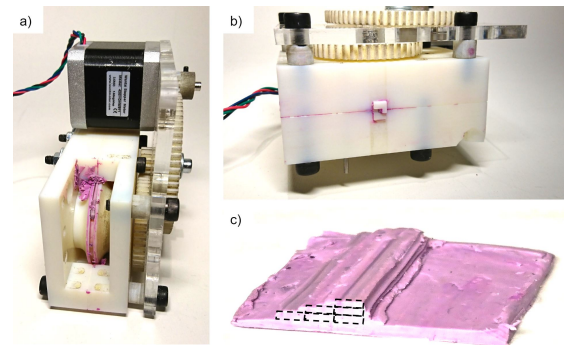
The wheel extruder prototype; (a) the flash formation causes material to build up at the inlet of the extruder; (b) the extruder seen from underneath, the die shape is similar to the design shown in Fig. 8; (c) a cross-section of a deposited structure.
